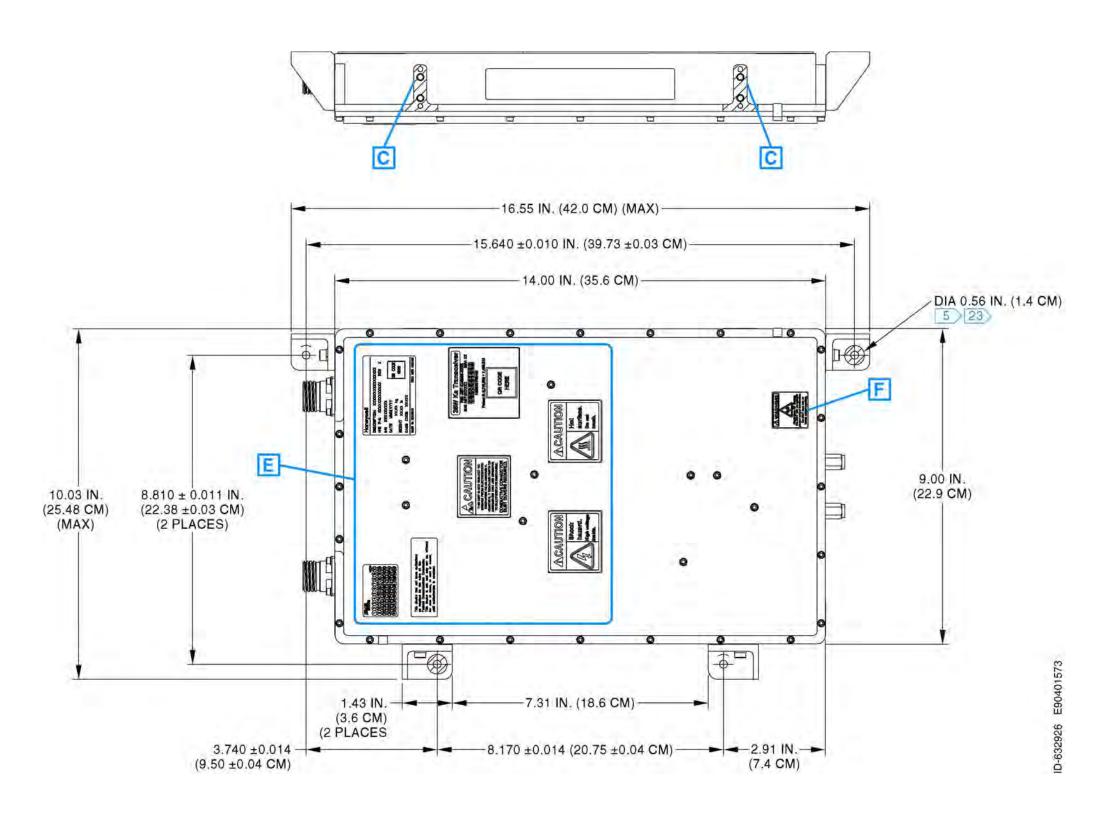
(Sheet 5 of 9) KRFU, Conduction-Cooled 1, Outline and Installation Drawing (90401573, REV F)
